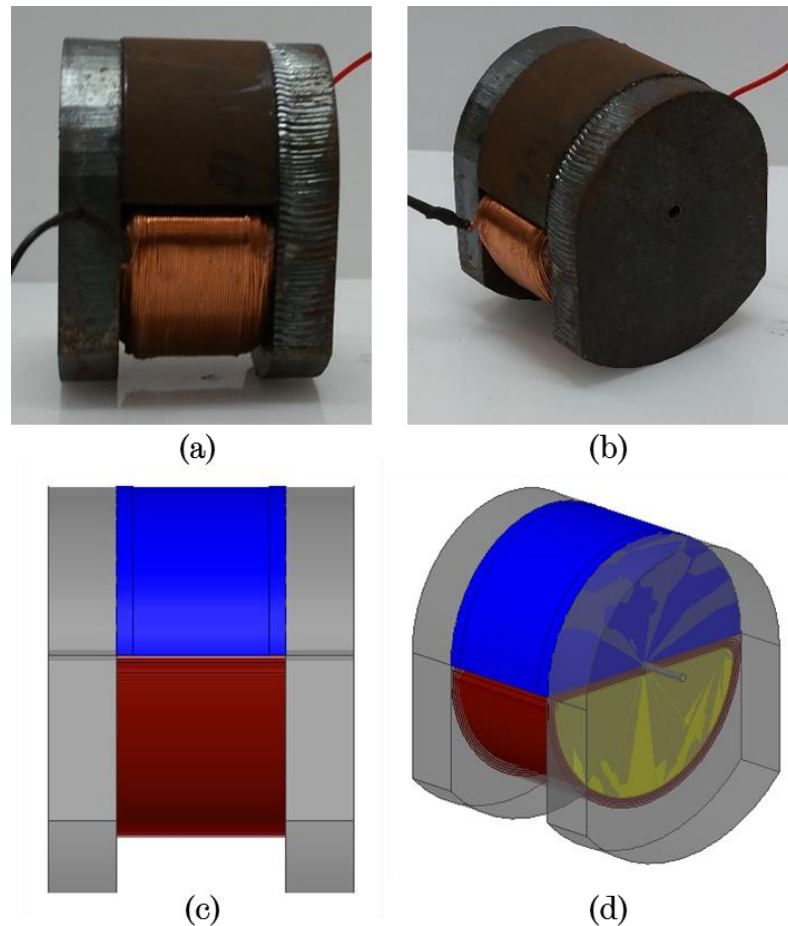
EPMAM device built with customised components. Physical design (a) front view and (b) isometric view. CAD model (c) front view and (d) isometric view.
